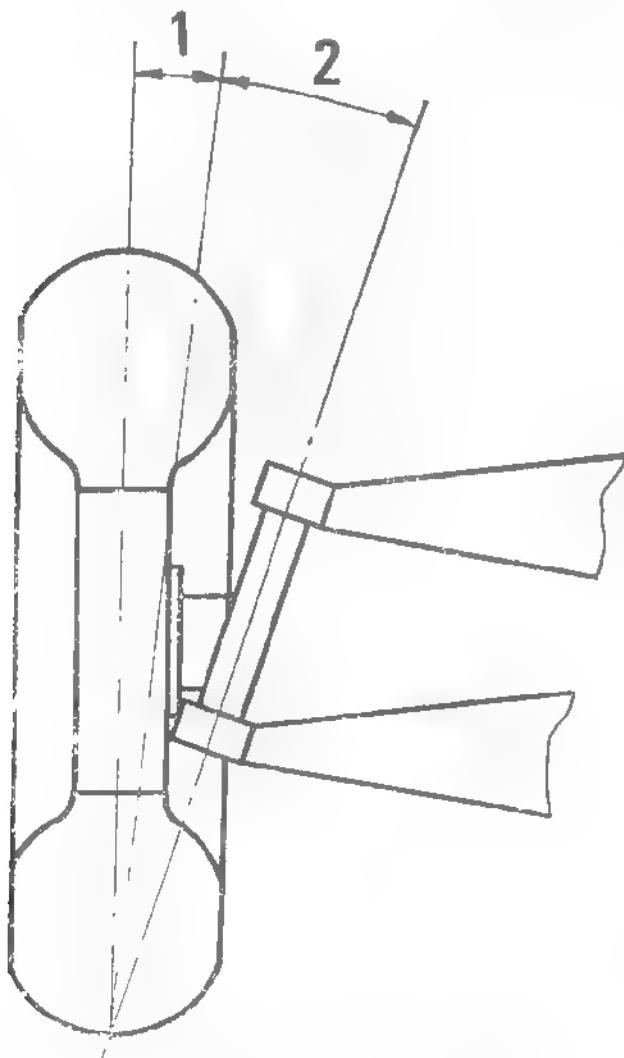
FRONT WHEEL KING-PIN CAMBER ANGLE
